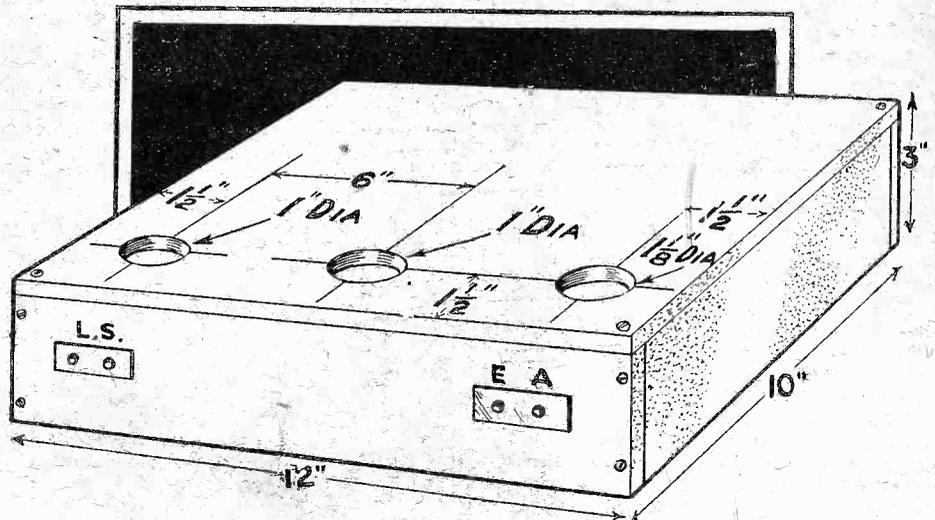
This shows the dimensions of the chassis and position of valve-holder holes.
